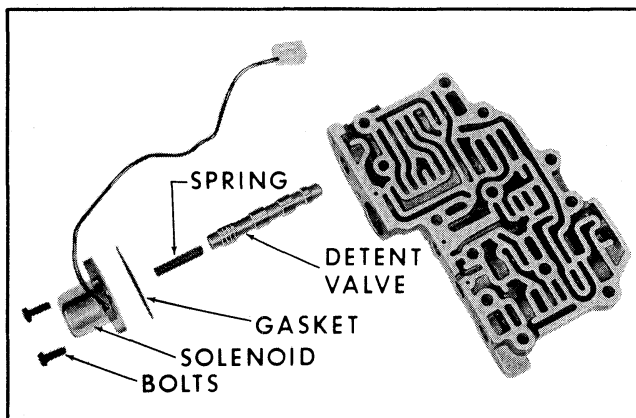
B-43 Downshift Solenoid and Detent Valve - Exploded View
